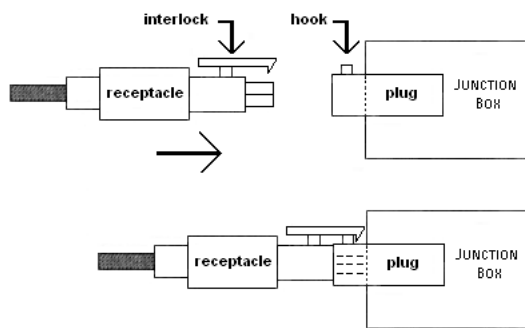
Side view of receptacle-plug insertion into the Power Supply Assembly.
